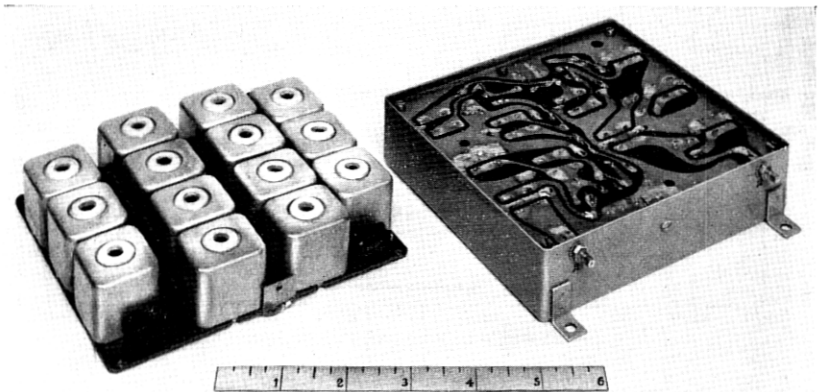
Mechanical construction of supergroup filter no. 3: right, printed wiring side; left, component side.
